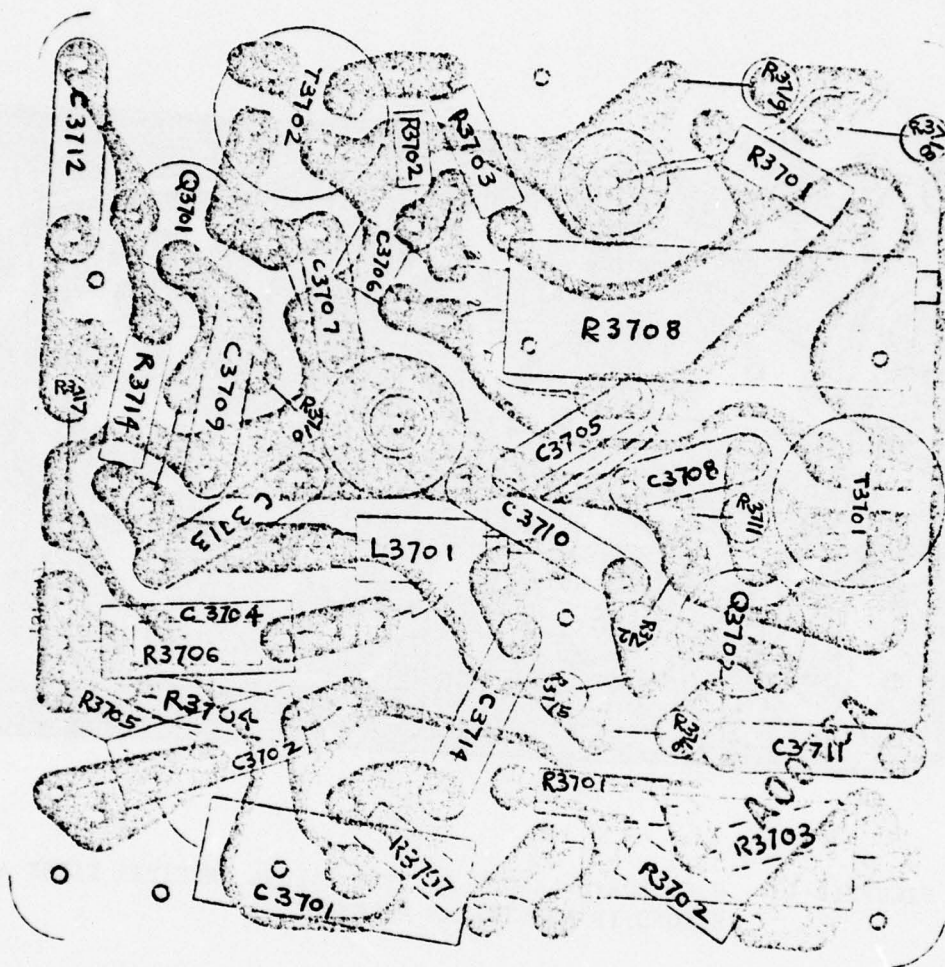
P.C. BOARD LAYOUT FOR THE A3700A CRS
